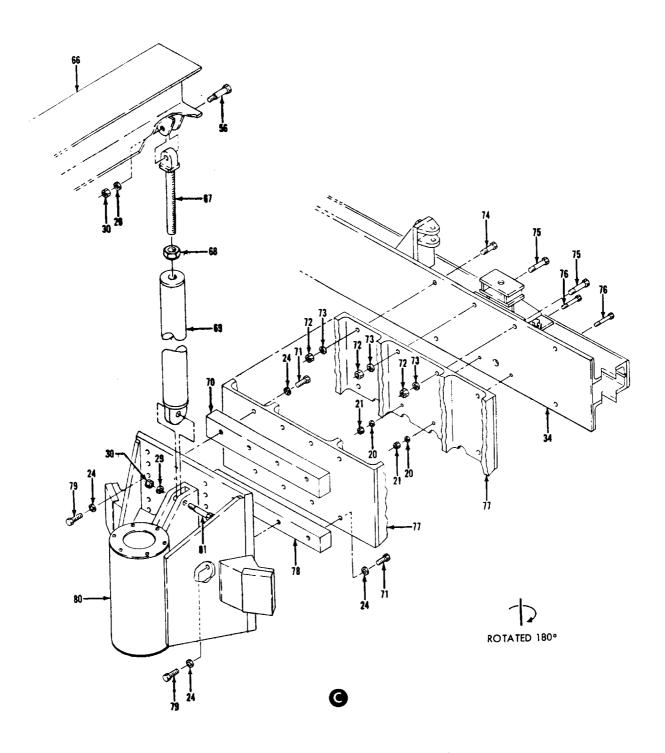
LES Coupler Assembly (Sheet 4 of 9)
